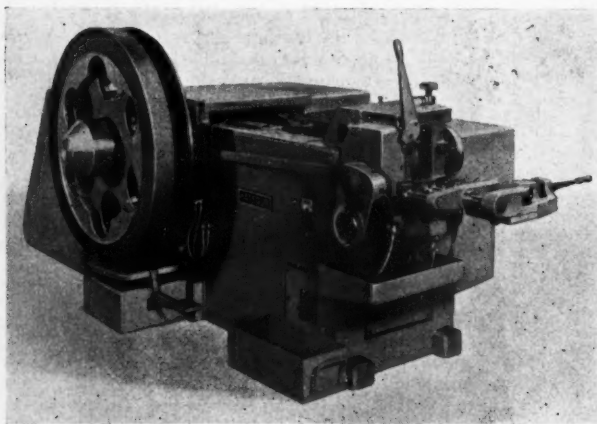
Hatebur type PKE-10 machine for cold pre-forming operations on blanks for hexagon nuts
